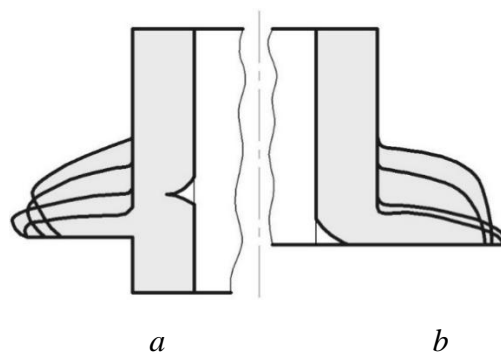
Contours of thickenings (a) and flanges (b) on a tubular workpiece
